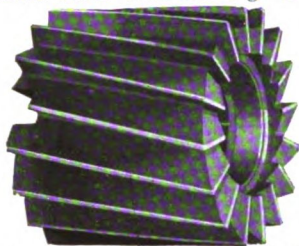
Right Hand Cut Right Hand Spiral End Mill
